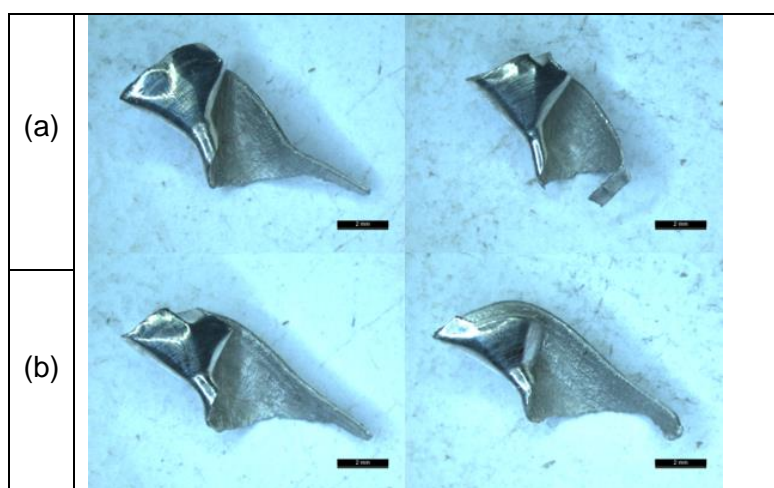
Chips obtained from drilling experiments on 6082-T6 based on 3-flute - (a) chips collected after drilling the first hole, (b) chips collected after drilling the final hole
